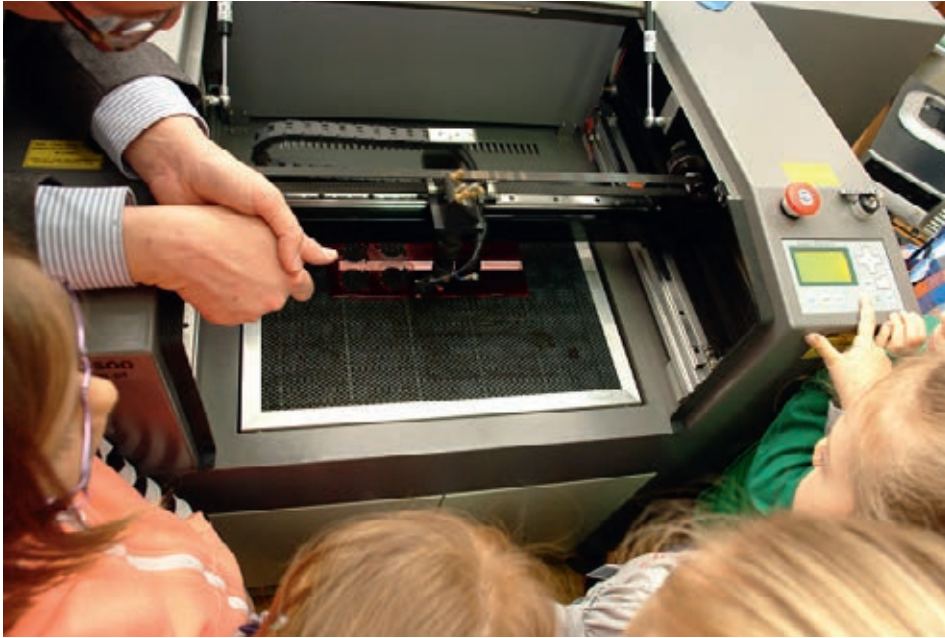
Adjustment of the head position in Laser-500 cutter (photo by M. Pasternak)
